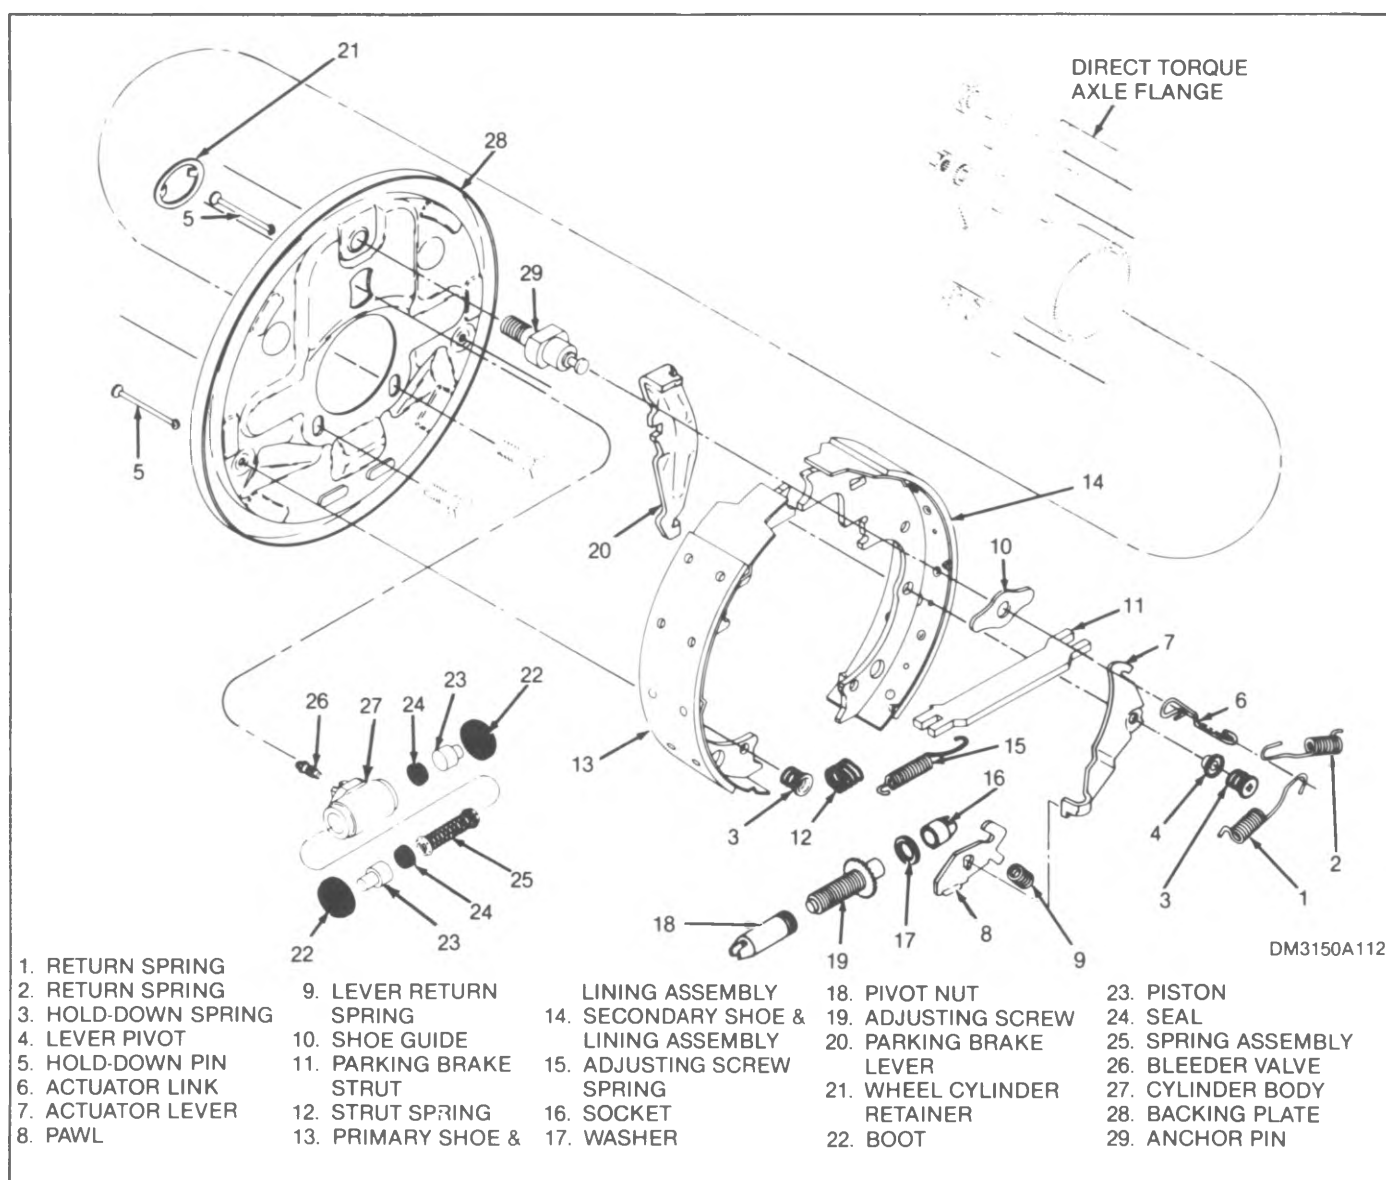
Direct Torque Drum Brake With Apply Actuated Adjuster
